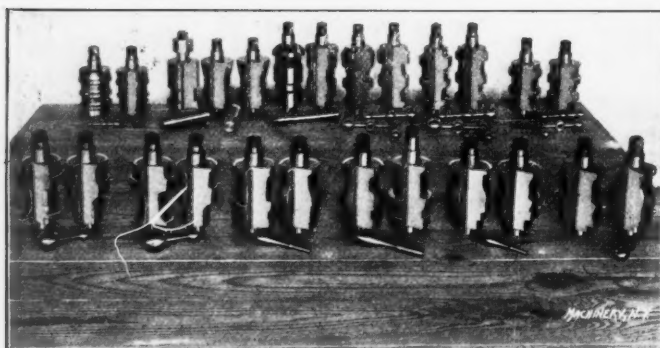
Cutters used on Special Forming Lathe, with their Products.
